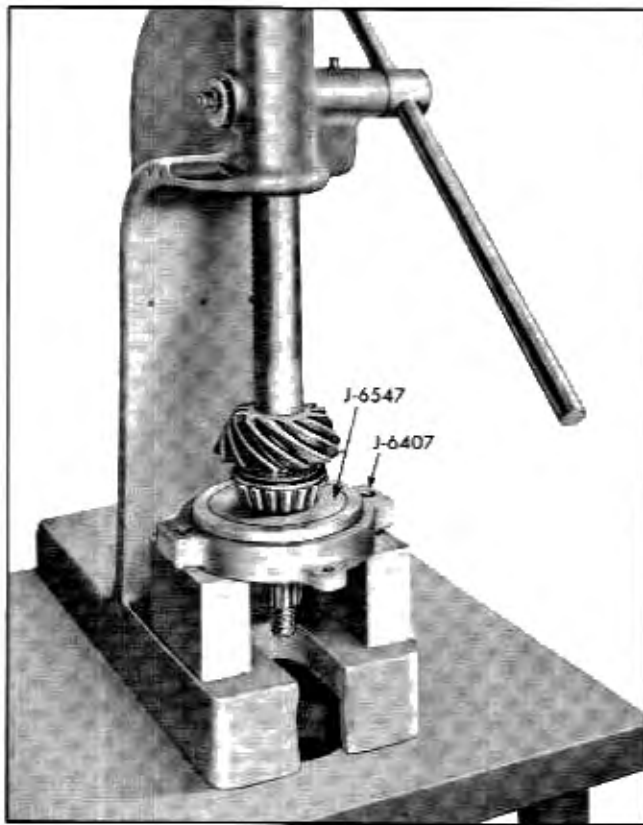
Installing Rear Bearing With Installer J-6547 and Press Plate J-6407
